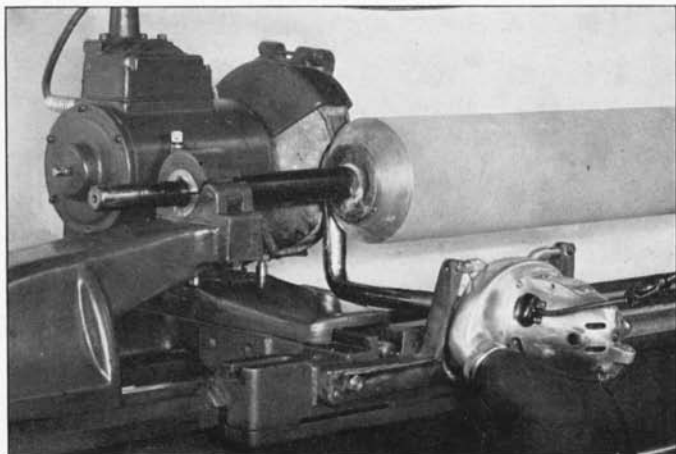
A lathe equipped with a dust exhaust system for grinding rubber rolls.
